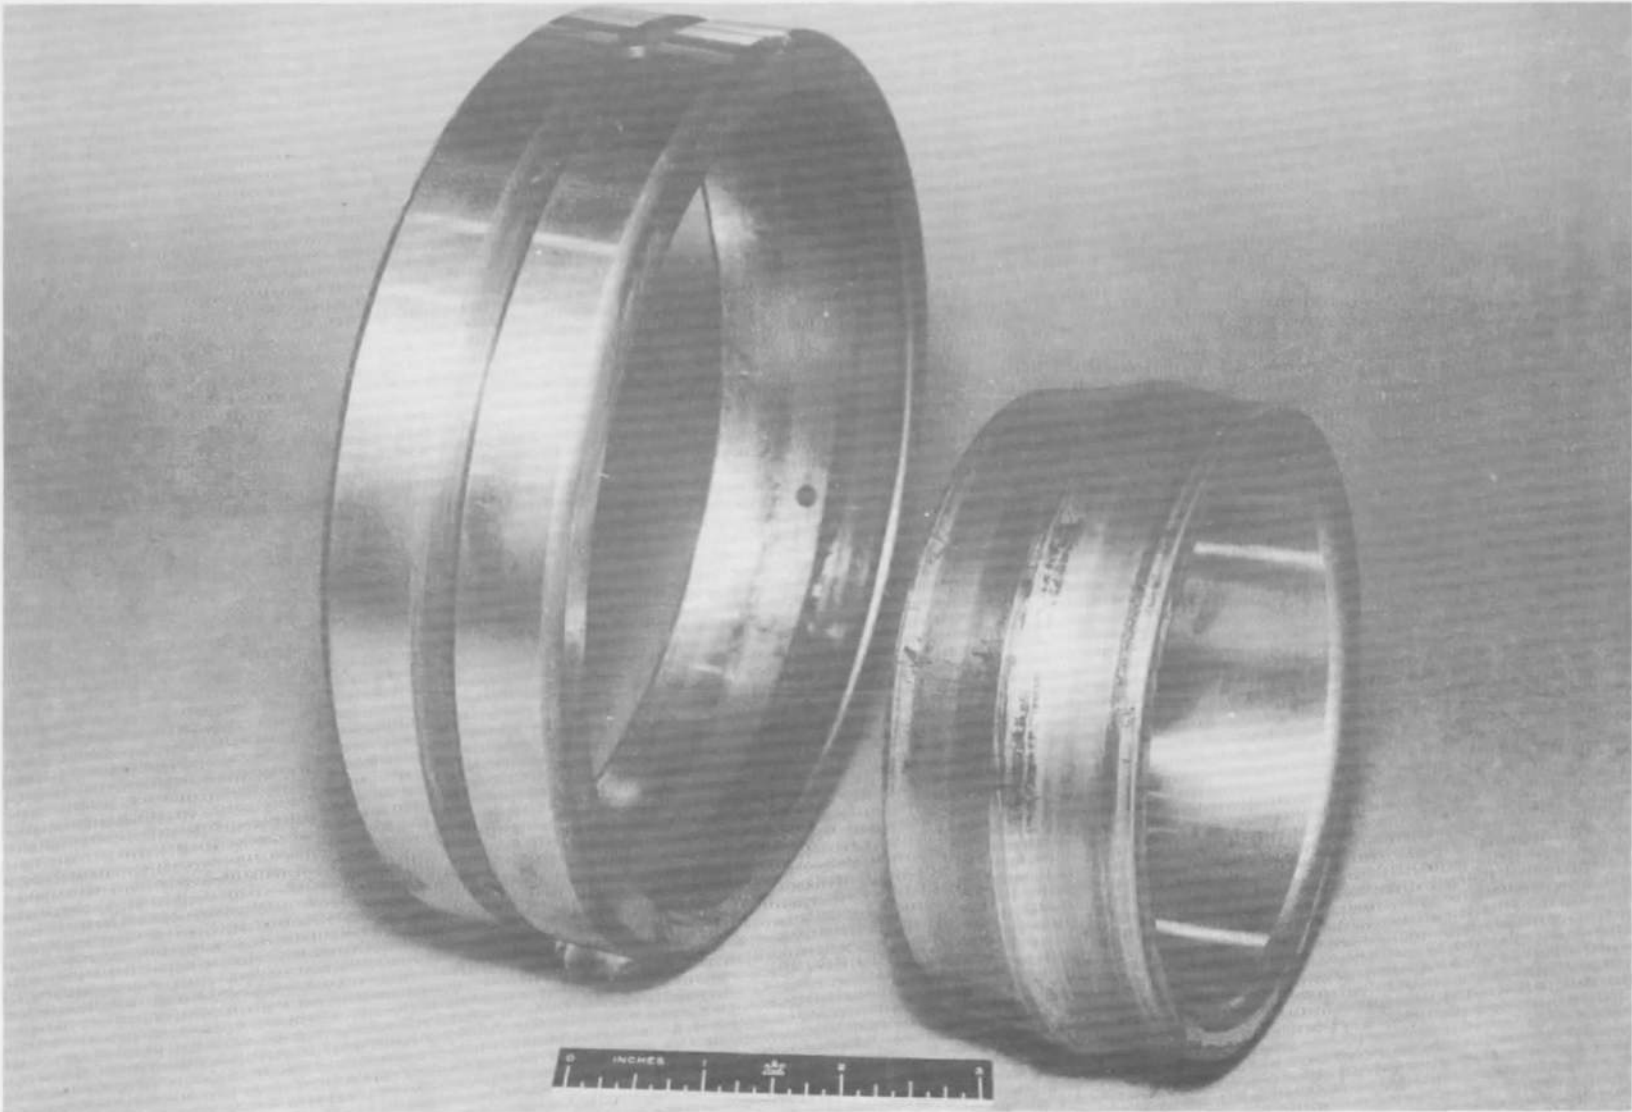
Test No. 1 Spherical Bearing Shown in Fig. 7 Only with Outer and Inner Races Exposed (left to right). Although Remaining Lubricant Film was Marginal no Damage Occurred to Bearing
